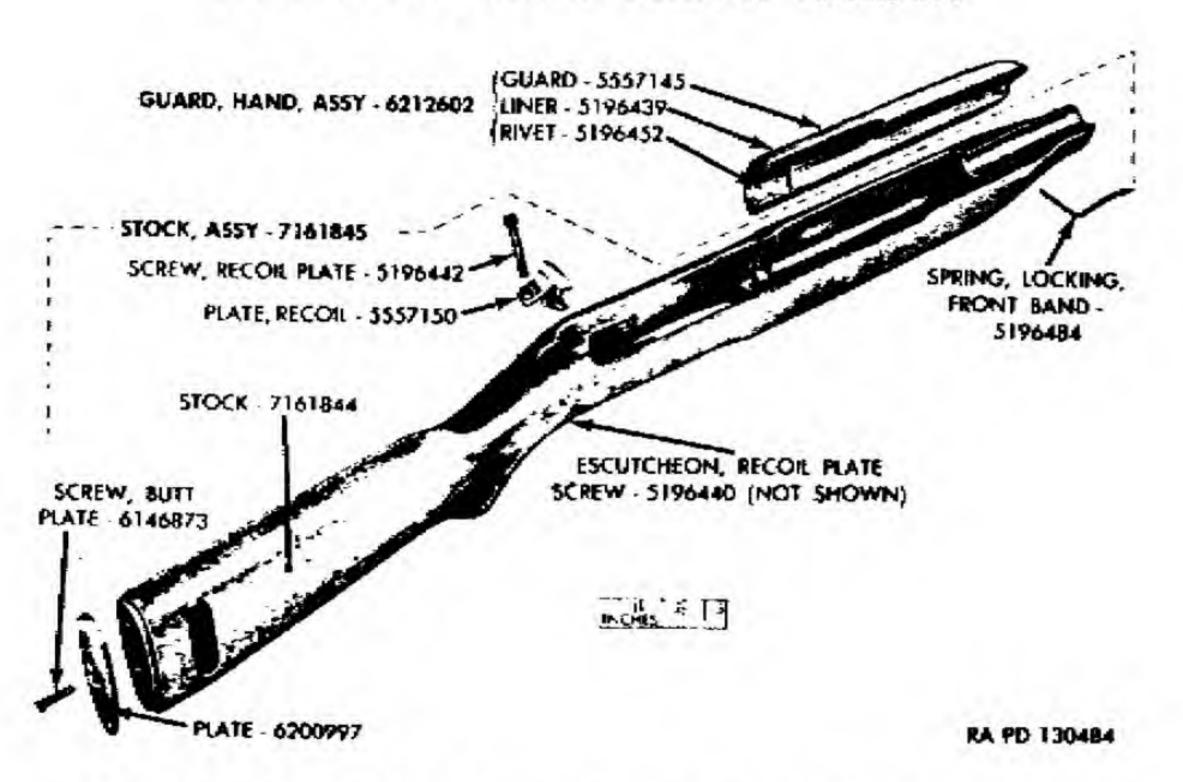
Stock and guard assemblies—carbines M1, M2, and M3.
